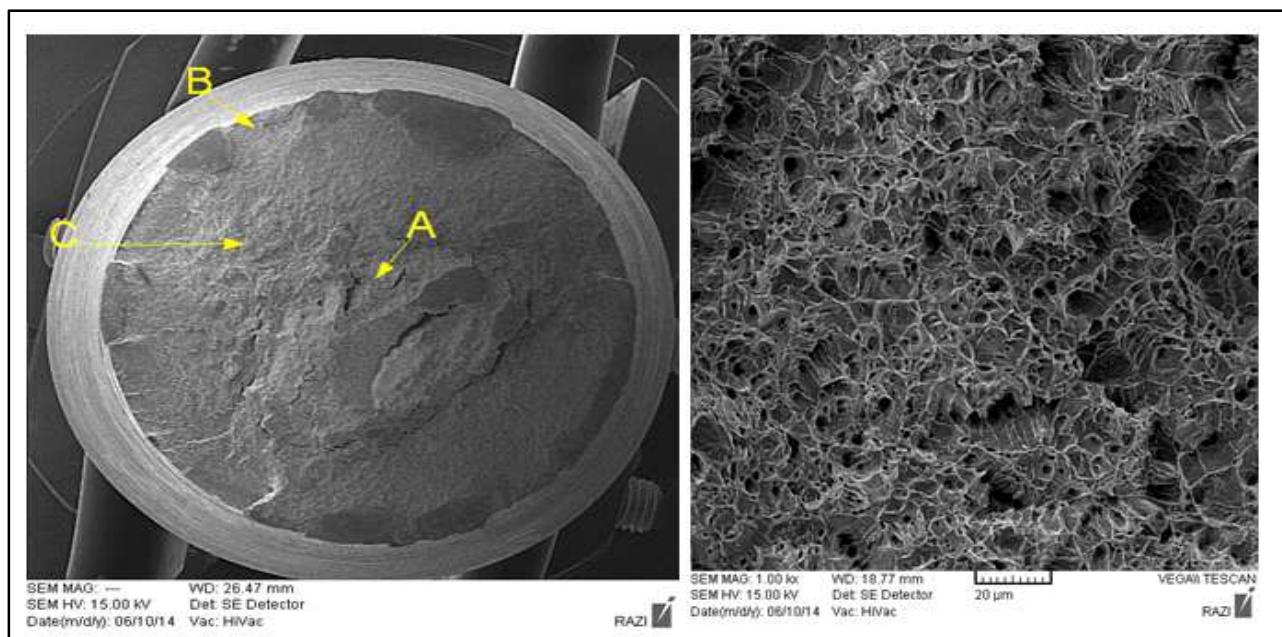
SEM Micrograph of Fractured Surface of investigated Medium Carbon Steel
